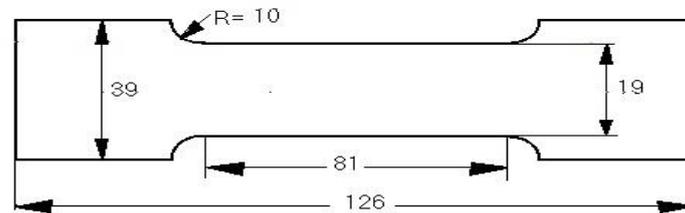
Tensile Specimen geometry (all dimensions are in mm)
